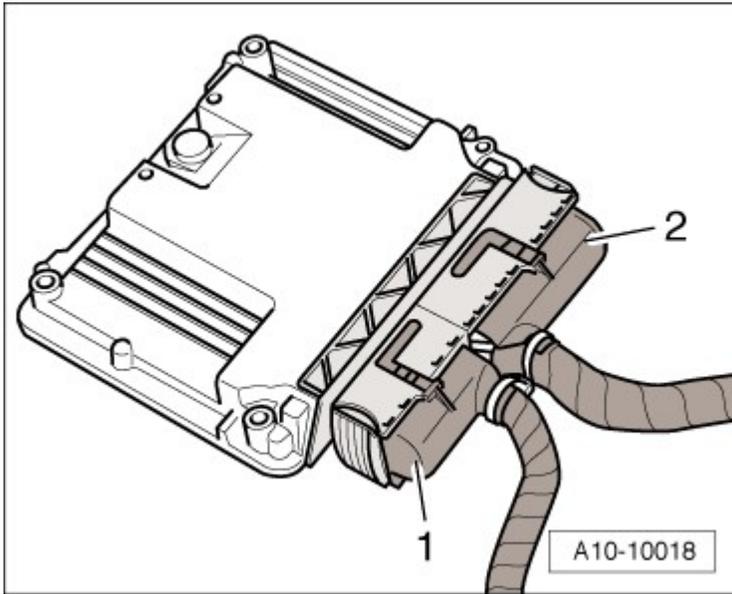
Identifying ECM And Engine Wiring Harness Electrical Connector
